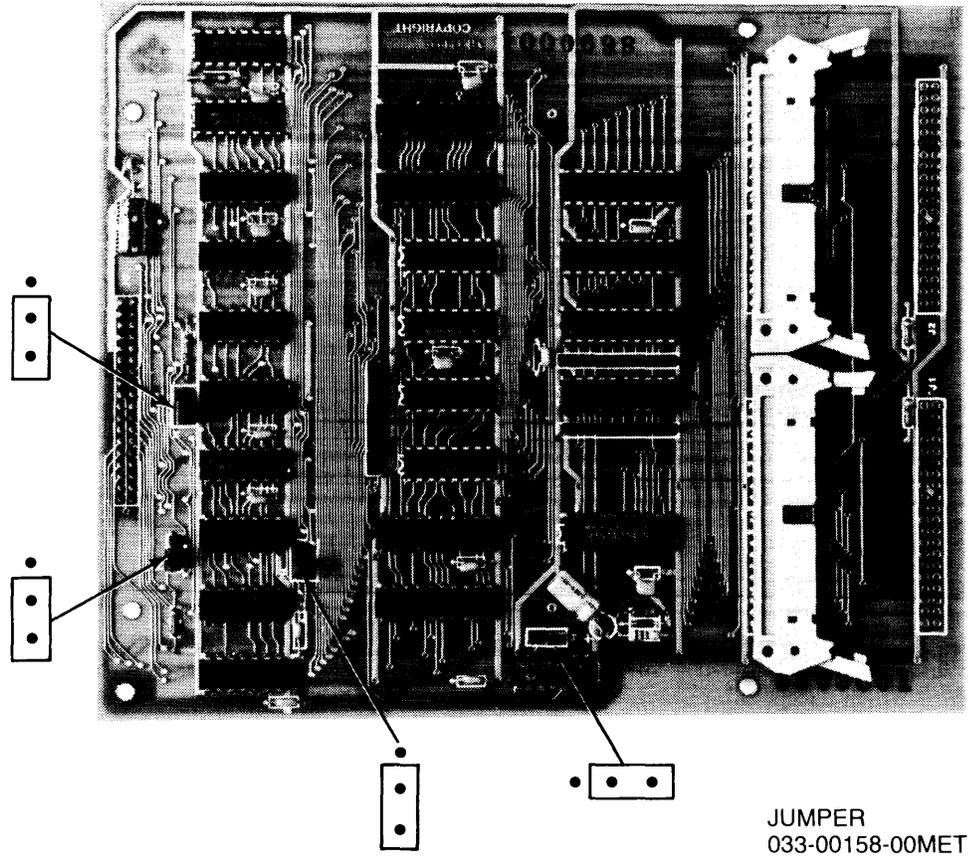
Parallel Interface Pc Assembly Jumpers
